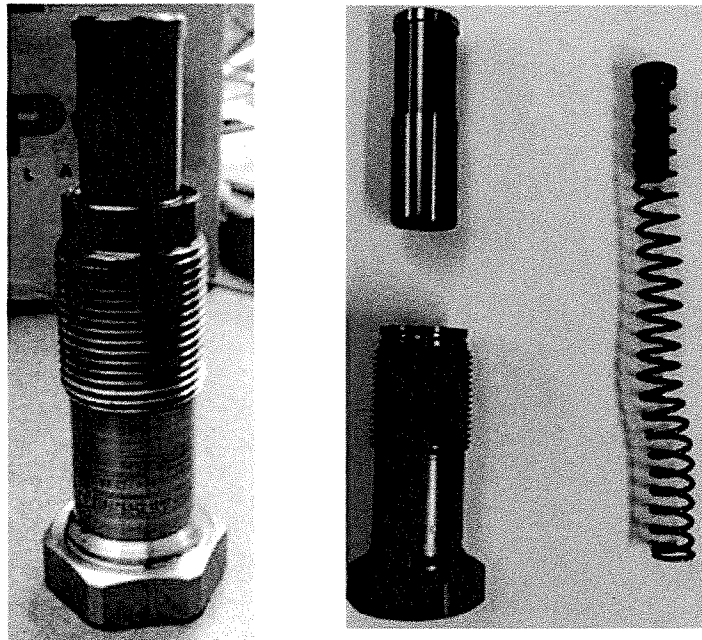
Figure A: Timing Chain Tensioner Assembled (left) and Disassembled (right)
